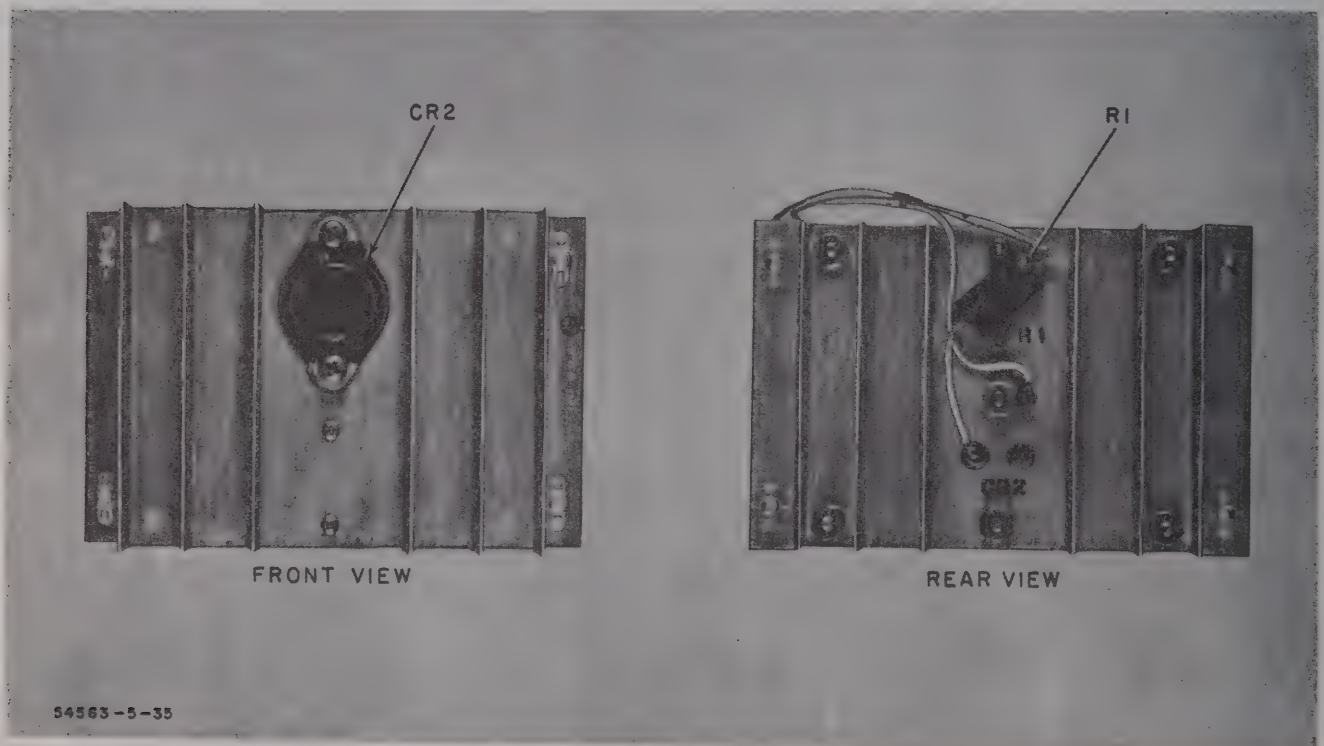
Heat Sink, ECI 67-02325-001, Part Location
